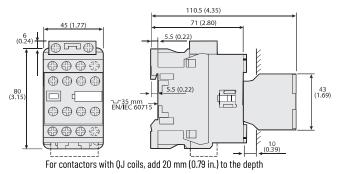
100-E09...100-E16 Contactors with Standard Coils and Side-mounted Auxiliary Contact
